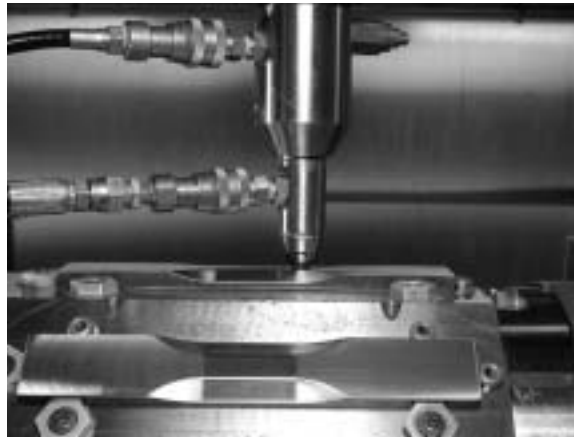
LPB processing of fatigue samples with at single point contact LPB tool in a 4-axis CNC mill.
